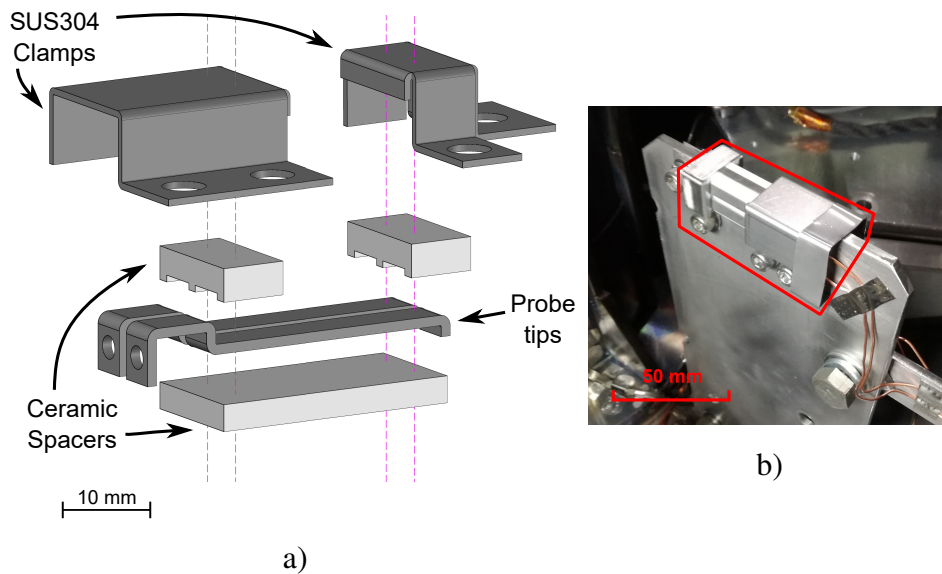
a) Exploded design concept and b) probe installed on Bottom-limiter. Reproduced from Plasma Fus. Res. 15 2402009 (2020) [22].
